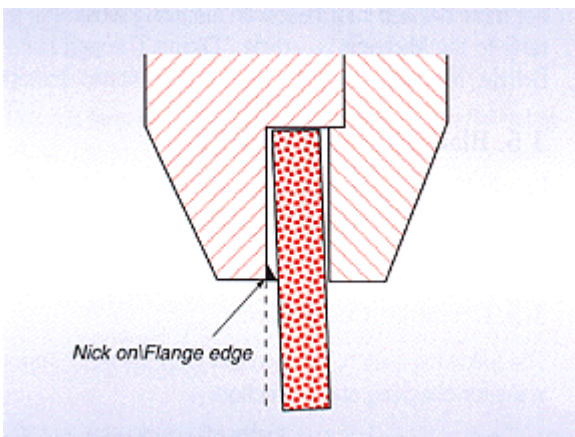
A Slanted blade due to flange/edge defect
